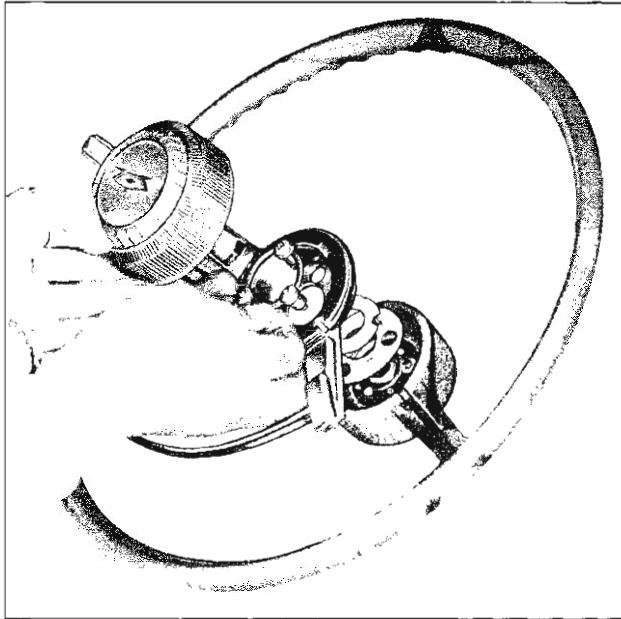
Horn Ring Attachments (1300 thru 1800 Series)
